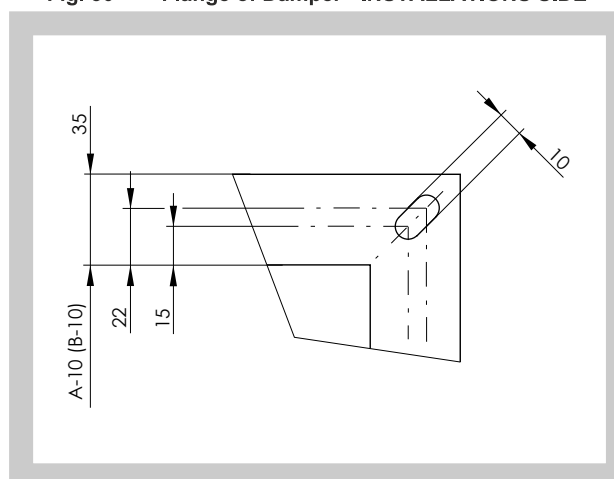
Flange of Damper - INSTALLATIONS SIDE
